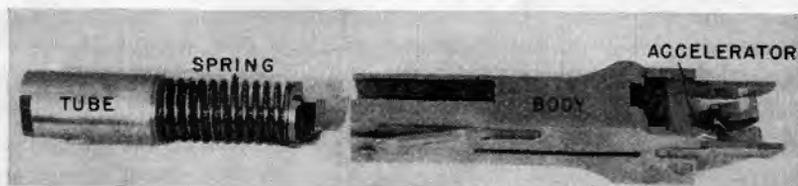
Oil buffer group, caliber .50 machine gun, M2.
